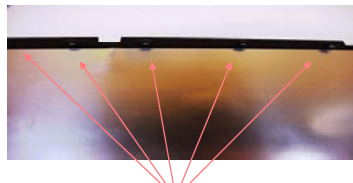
To remove the 5 rivets push the pin out or cut the rivet. Replacement rivets are included with this kit. The Red Spacer can now be removed for use in Figures 3 & 4 shown below
